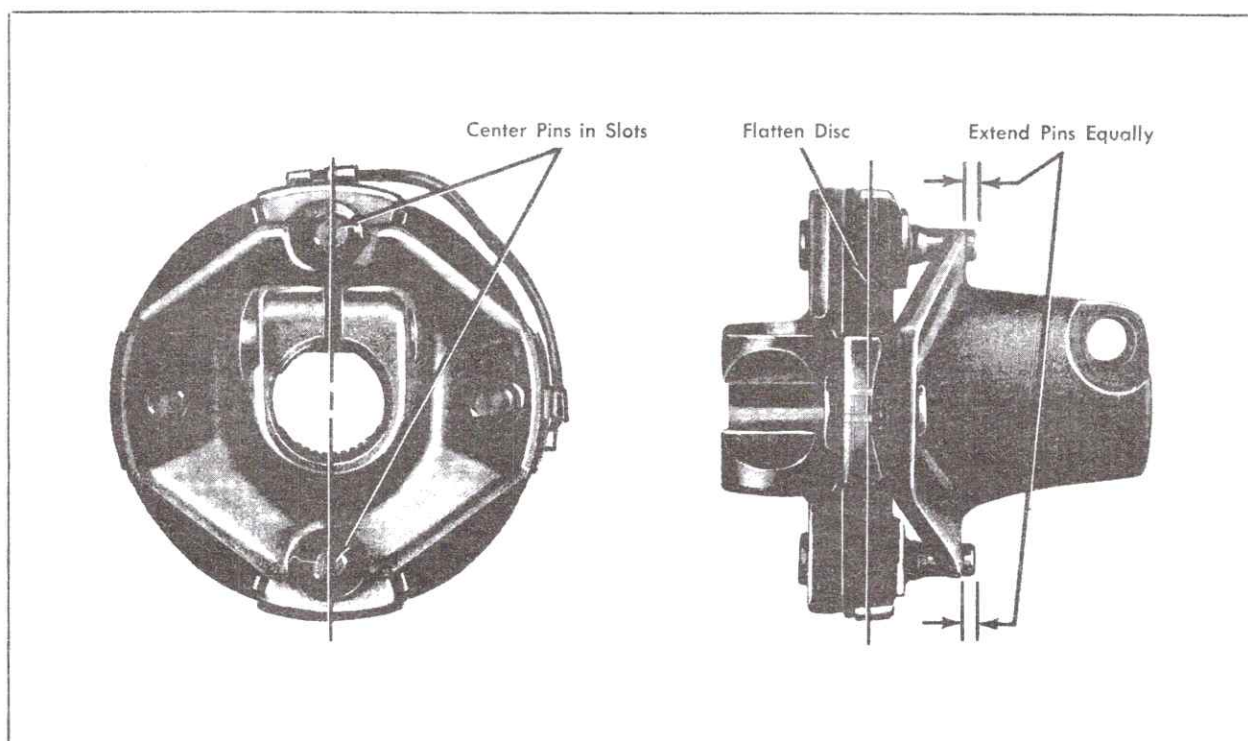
Flexible Coupling - Steering Column to Gear Alignment
